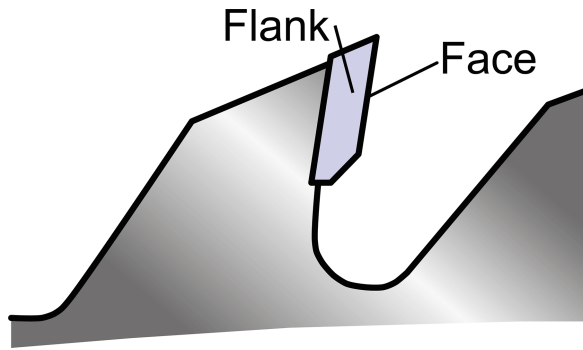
Schematic representation of a tooth of a circular saw blade.
